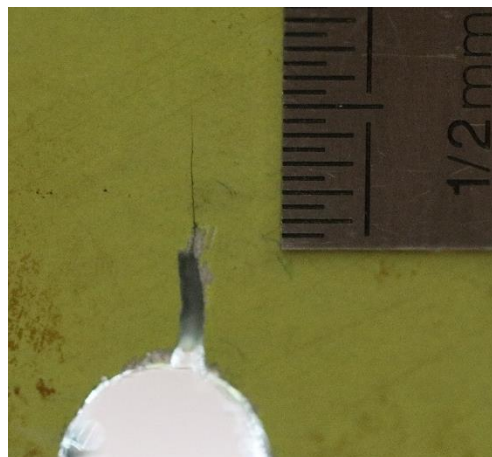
Crack as viewed from outside skin of the plate when the specimen was loaded to 85kN.
